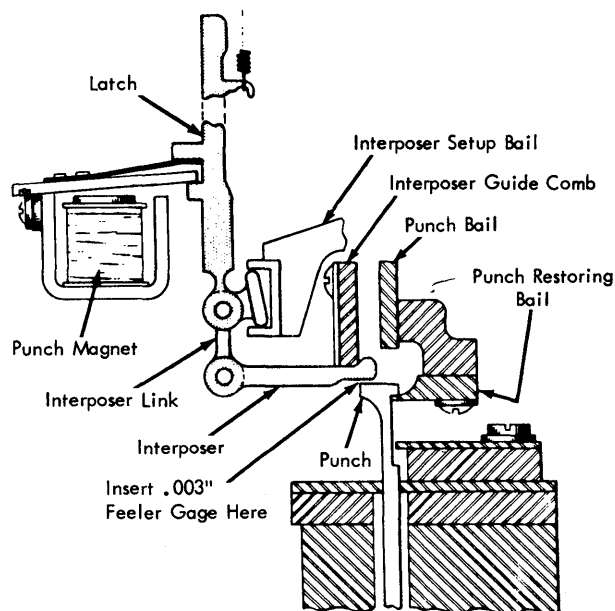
Interposer Guide Comb Clearance Adjustment
